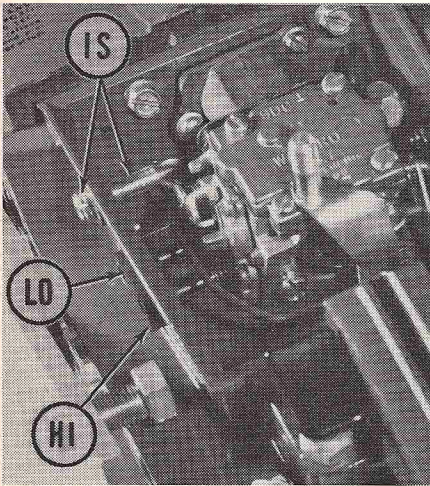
View with air filter cover and filter element removed showing carburetor and adjustment points.
